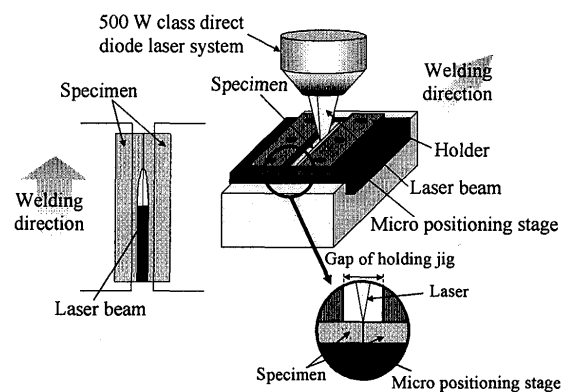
Experimental apparatus for butt welding of thin Cu foils
